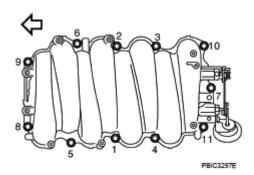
Identifying Intake Manifold (Upper) Mounting Bolts Loosening Sequence
